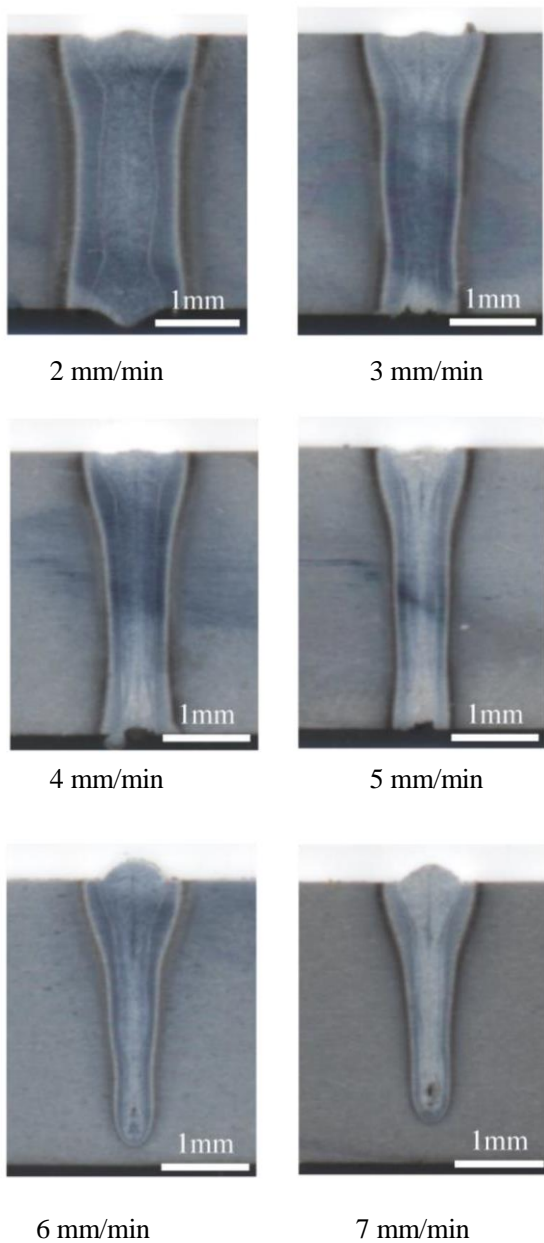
Cross sectional microstructure in the weld of F82H after laser beam welding
